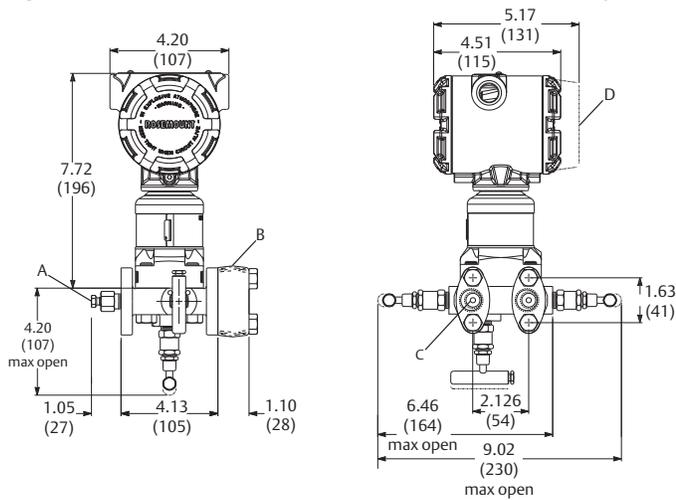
Rosemount 305RM 2-Valve Traditional DIN Style Manifold
